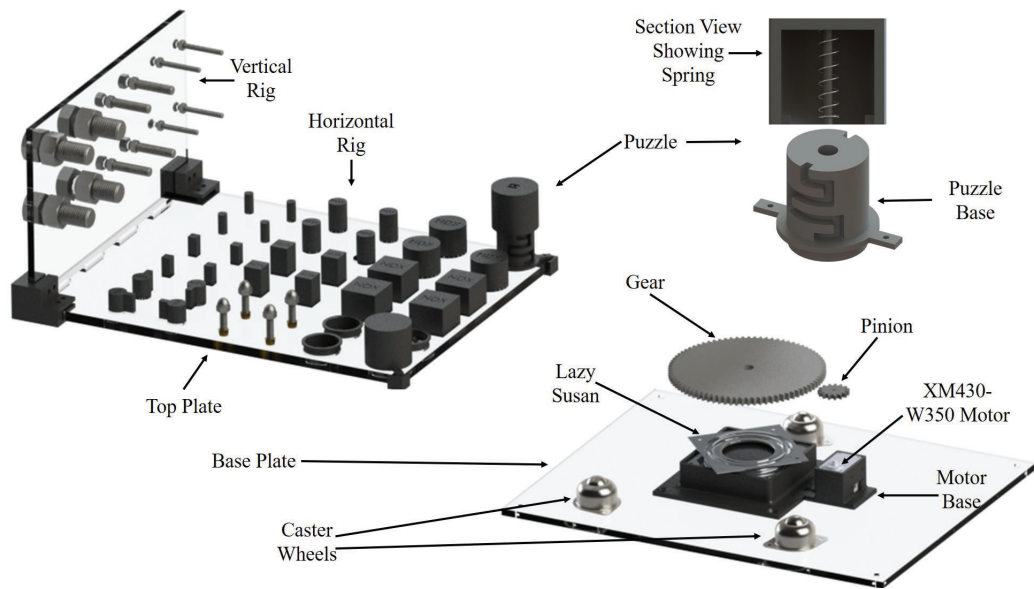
Exploded view of the proposed dynamic dexterity test board.
